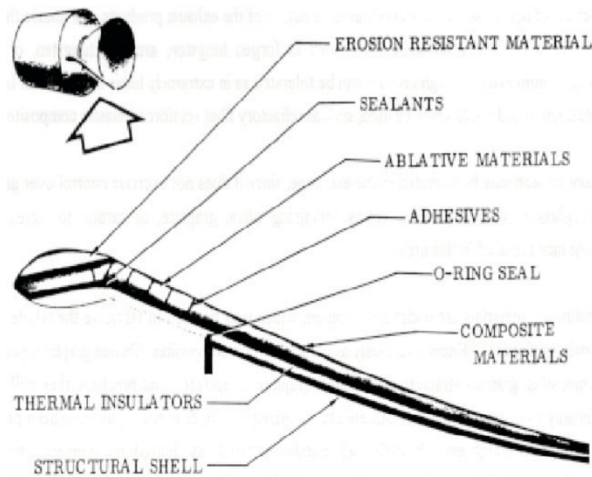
Cross-sectional view of a solid rocket nozzle [17].
